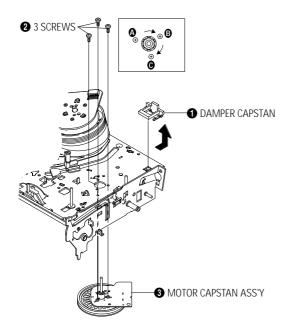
Damper Capstan, Motor Capstan Ass'y Removal
